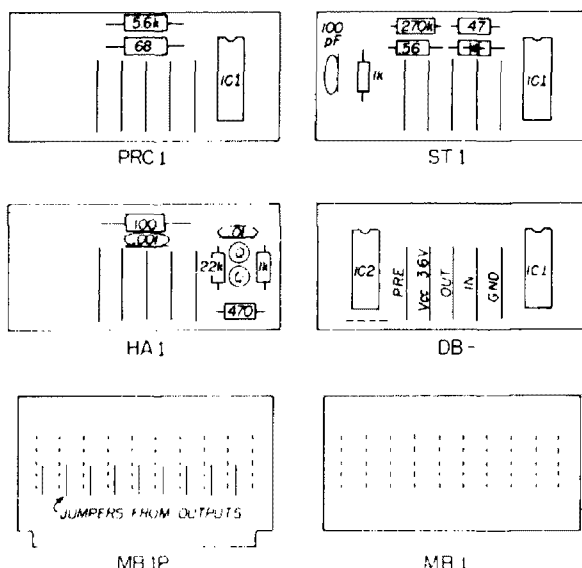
Top of PC boards showing parts layout. Dashed jumper on DB board is required only for DB7 and DB9 circuits.
